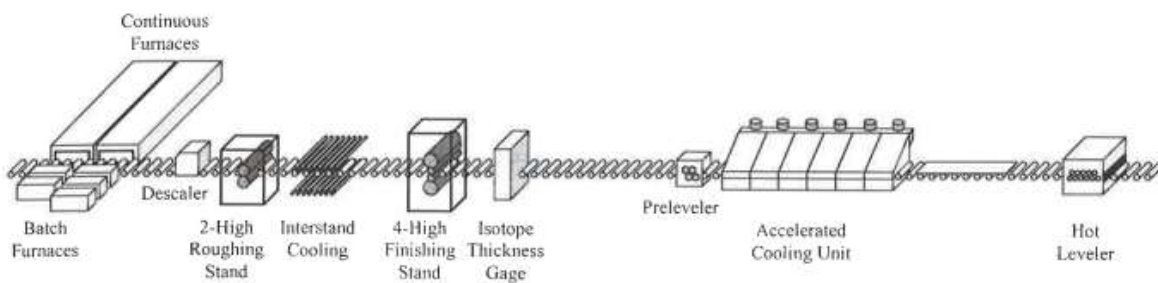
Schematic diagram showing the layout of the Burns Harbor 160" Plate Mill with preleveler and ADCO unit in place.
